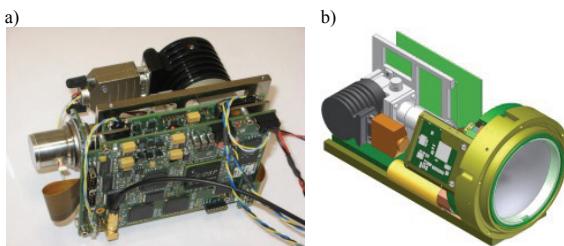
a) Photo of LWIR detector from AIM company, b) image of CAD design of LWIR camera module prototype
